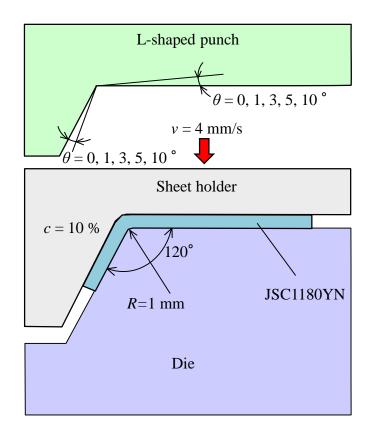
Dimensions and trimming conditions for trimming with the L-shaped punch
